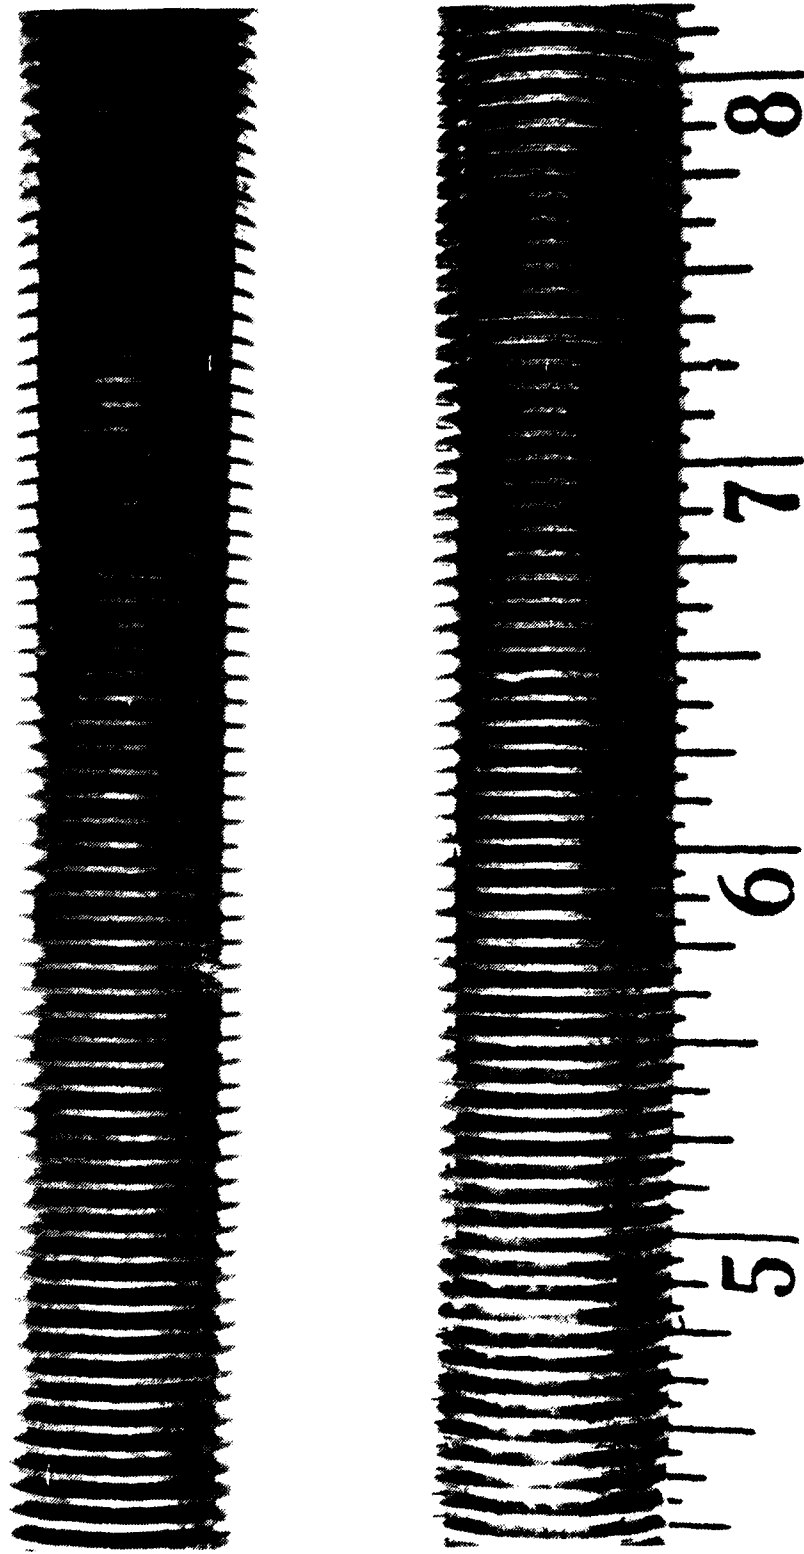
Enlargement of Machined Surfaces, QMC (Top) and QMCNPS (Bottom).
